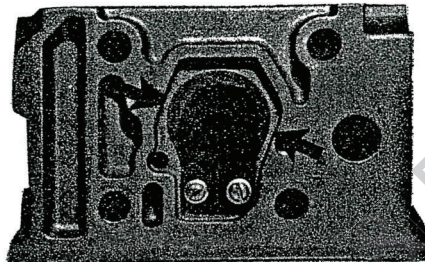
B — When installing reed valve on air box (models with flat reed intake valve only), be sure reed is centered between the two points indicated by arrows.
